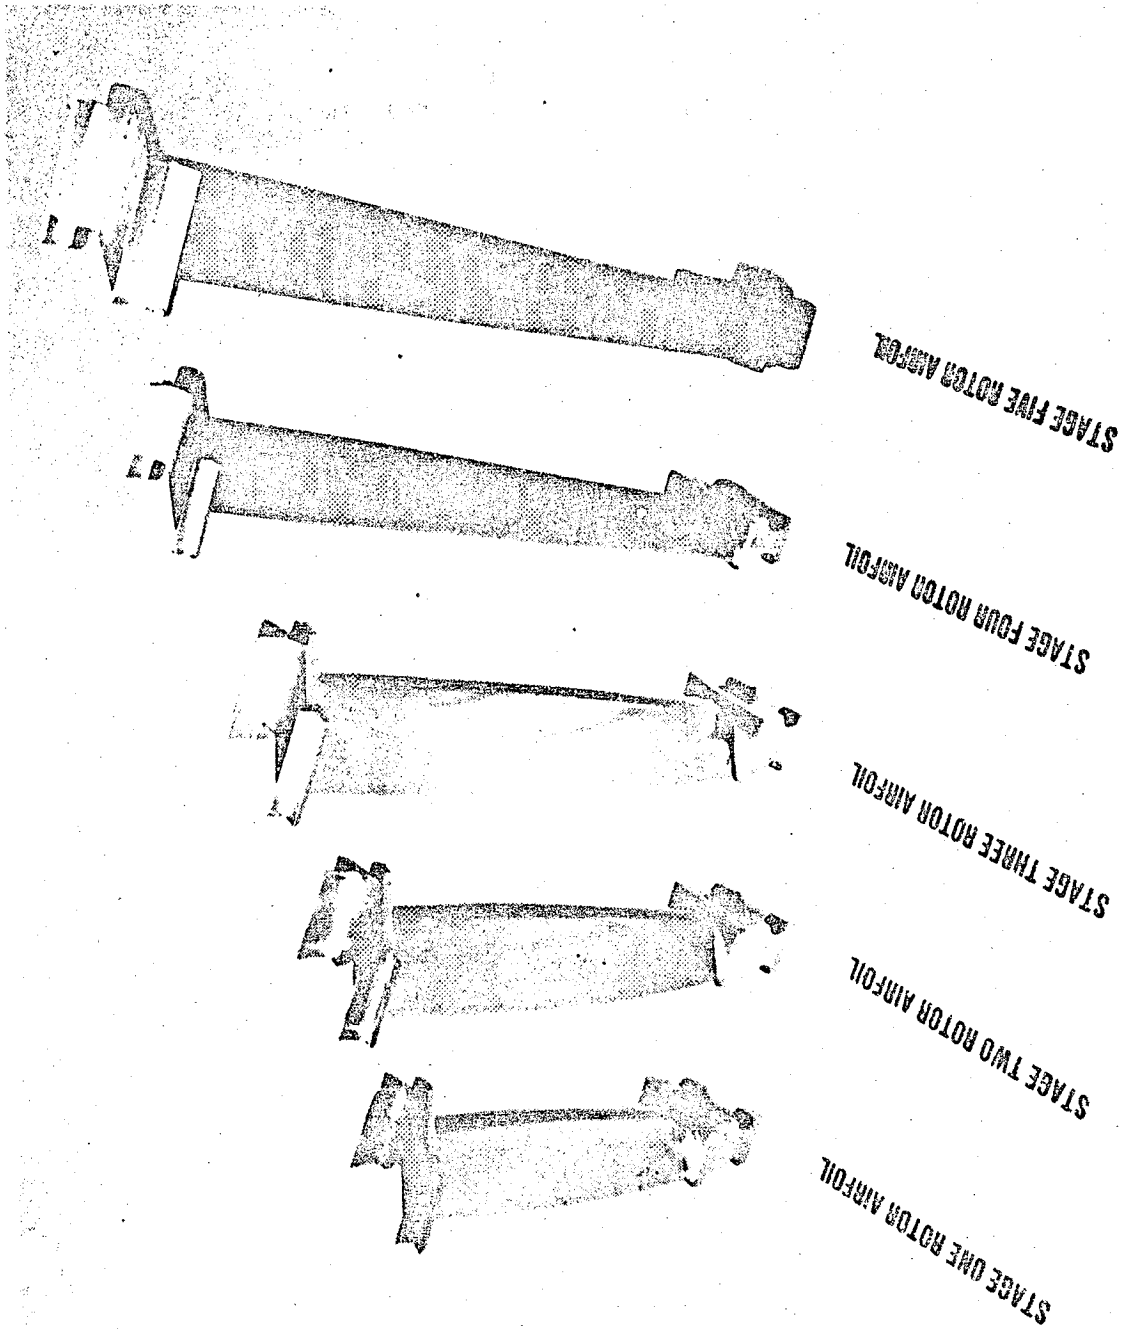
Block II Rig Rotor Blades Viewed Aft Looking Forward.
